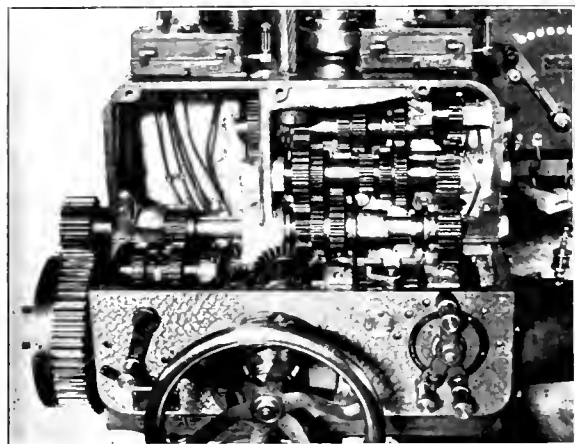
Part of Gear Box Removed Showing Sliding Transmission
